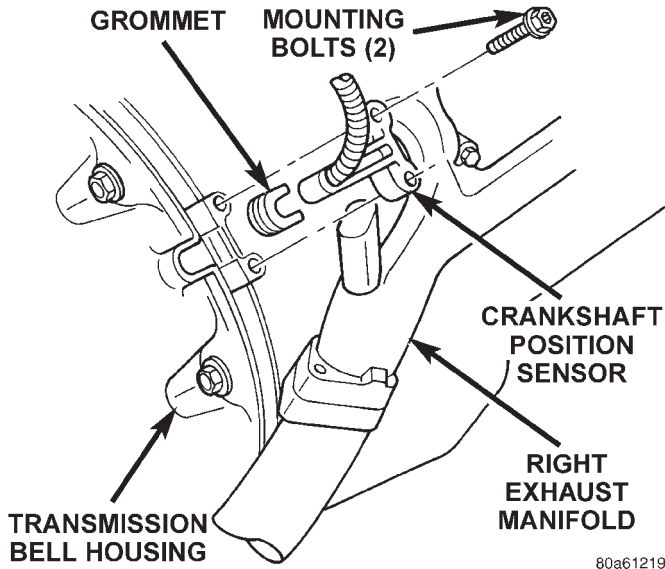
Crankshaft Position Sensor—5.2L/5.9L Engines
